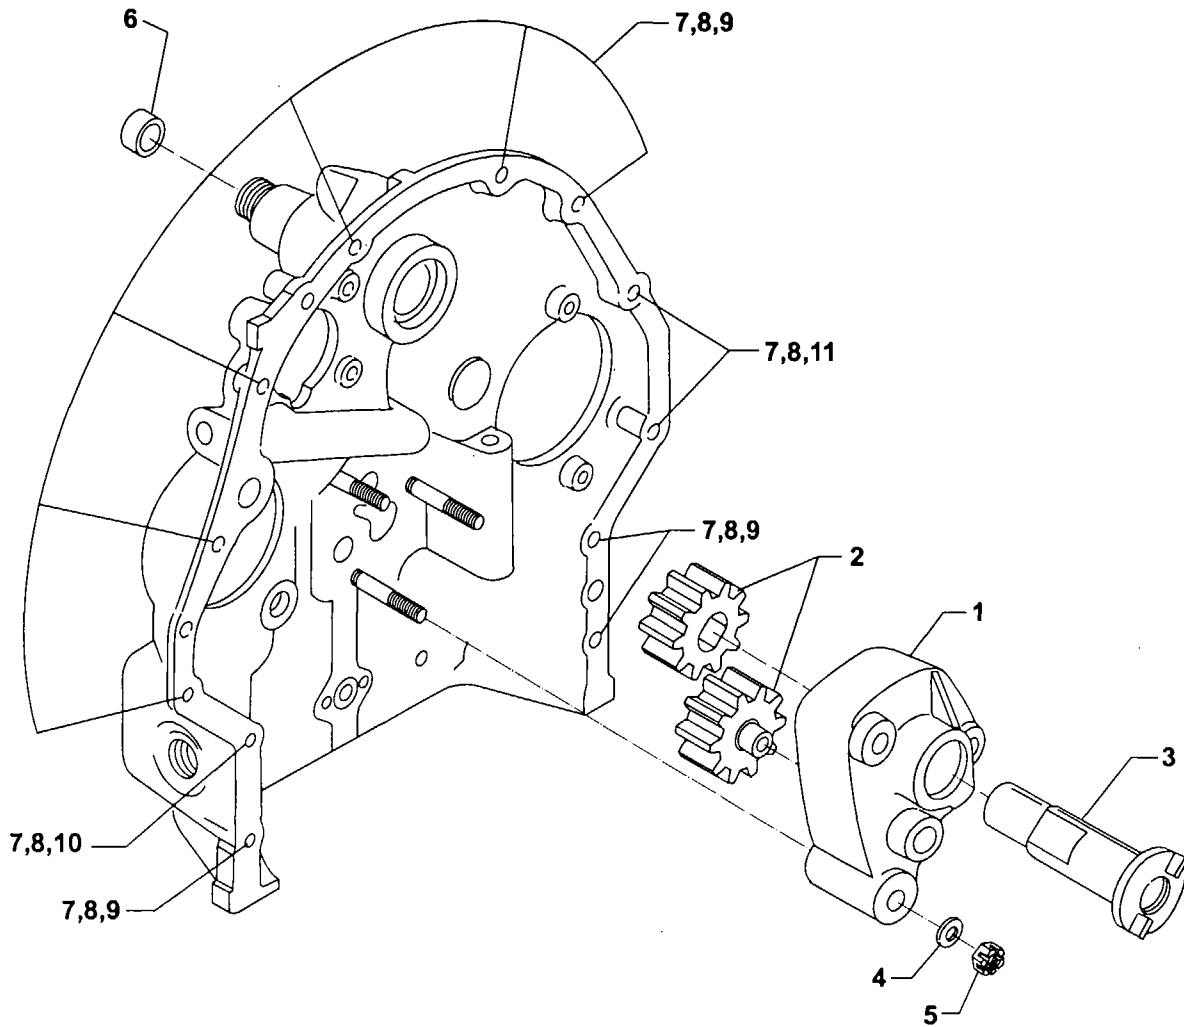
OIL PUMP ASSEMBLY AND ACCESSORY HOUSING ATTACHING PARTS
